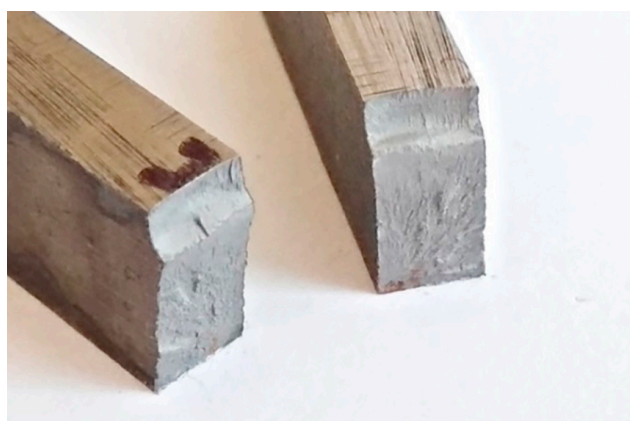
Fracture surface appearance – water (bending test)
